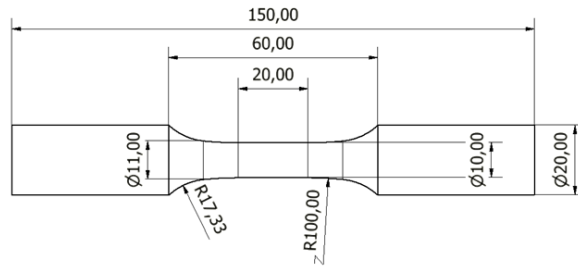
Specimen geometry of the specimen used for fatigue testing (All dimensions in mm)
